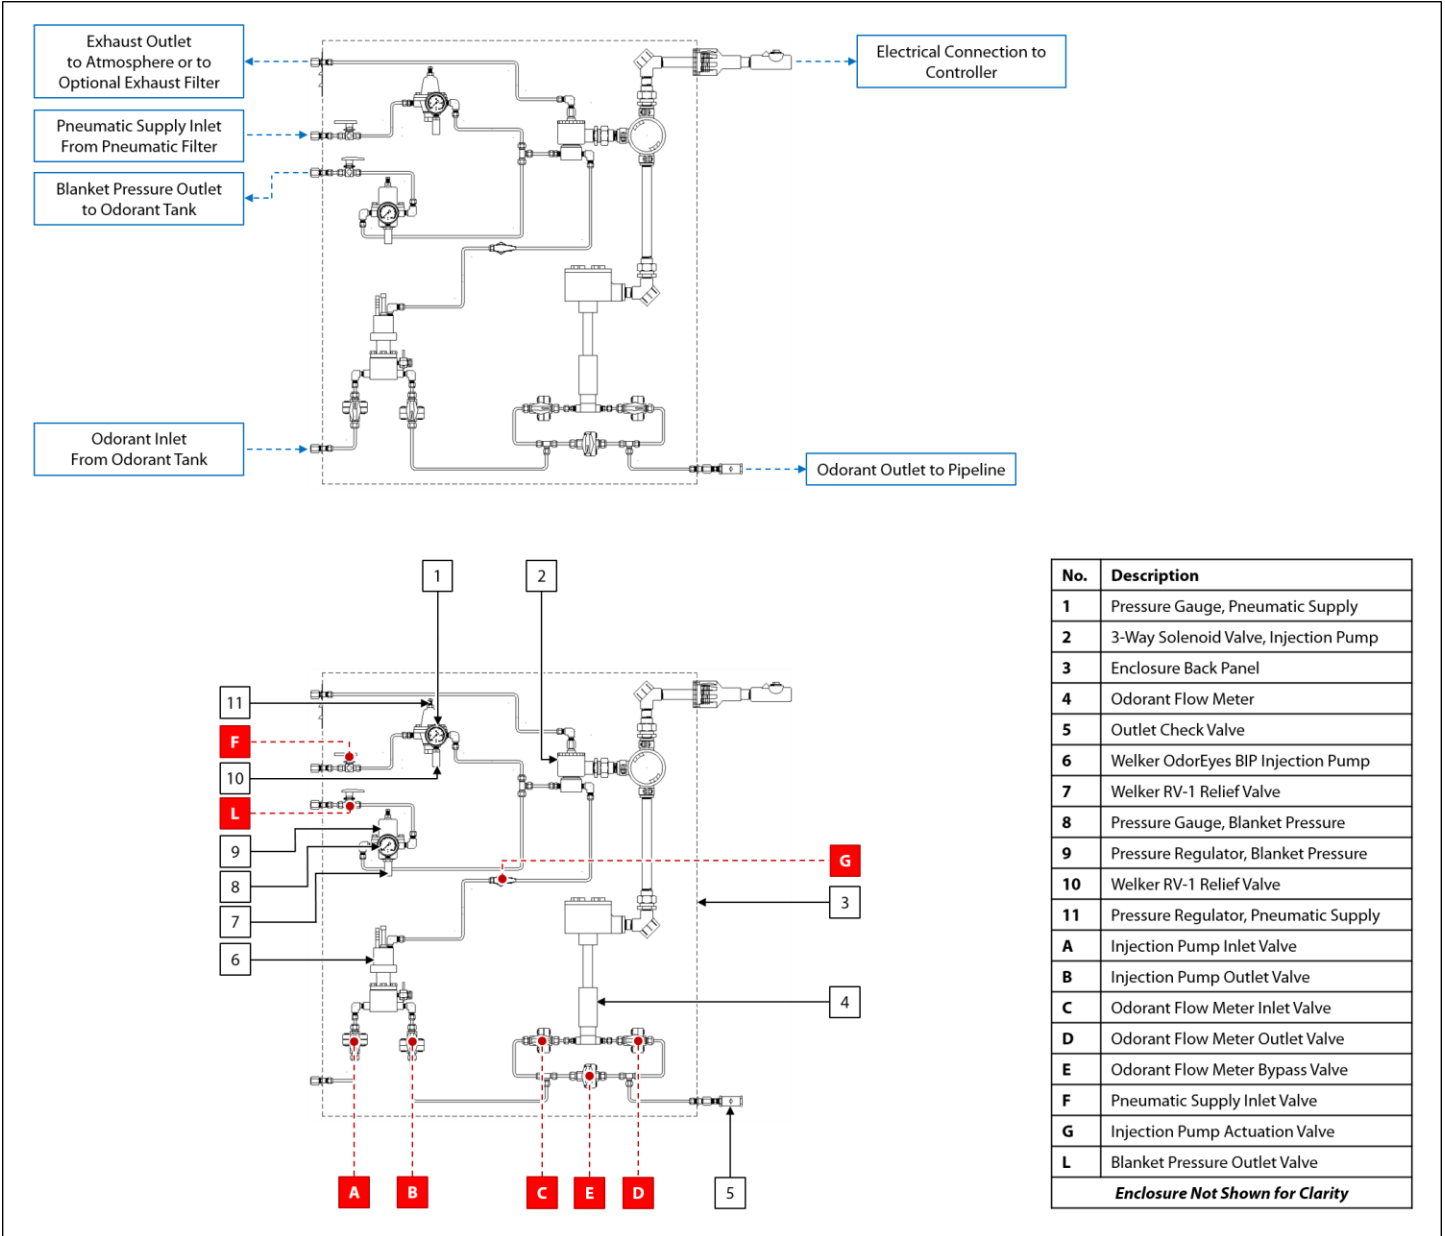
Pump Cabinet – Single BIP Injection Pump With Blanket Pressure Regulator
